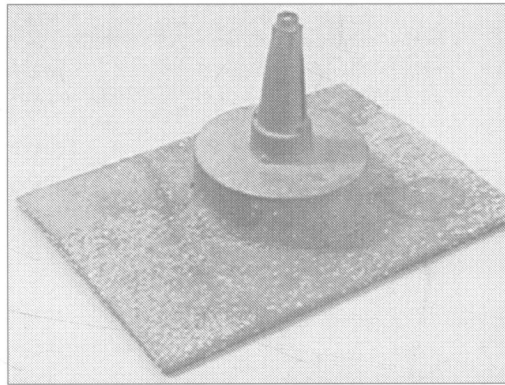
Die casting tool produced from *RapidTool™* inserts
